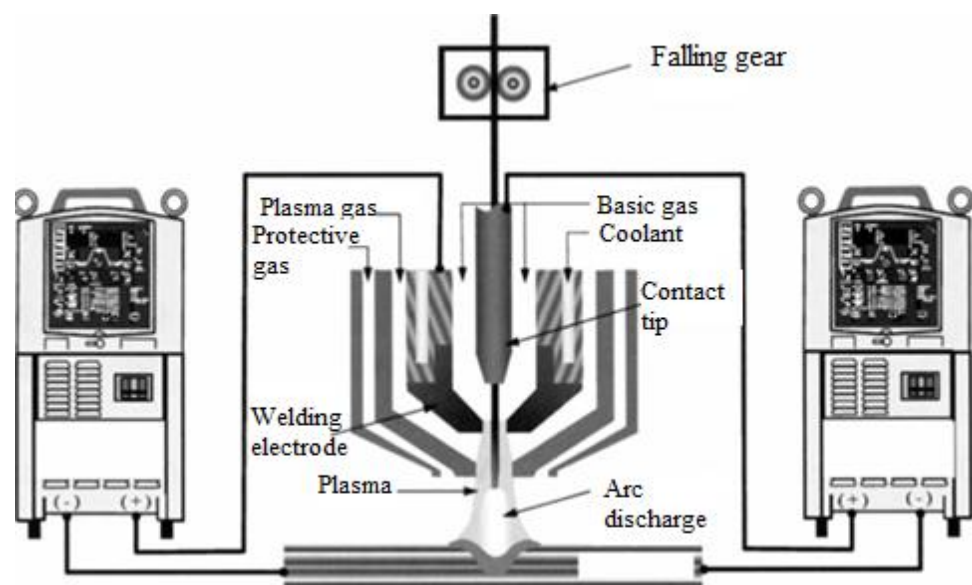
Plasma welding with a consumable electrode
